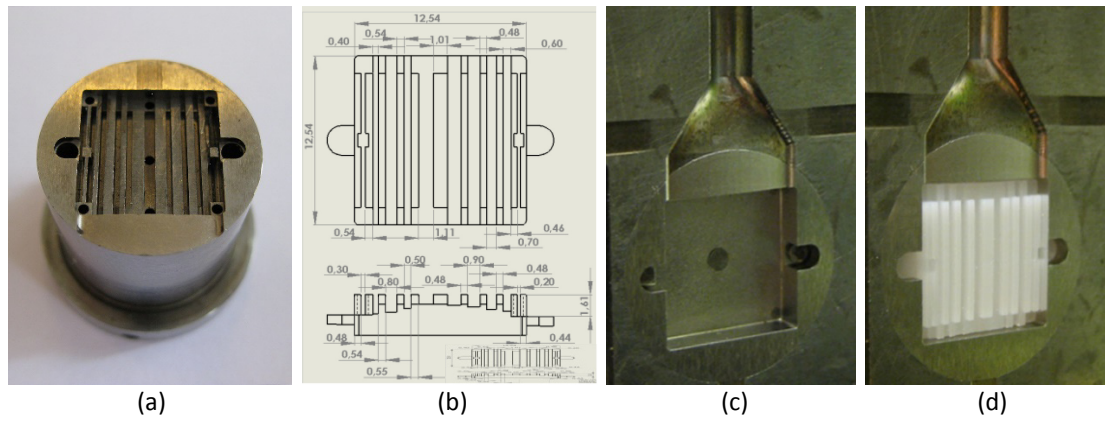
First shot: (a) micro structured tool, (b) part design; second shot: (c) tool cavity, (d) first moulded component inserted prior the second component moulding cycle.
